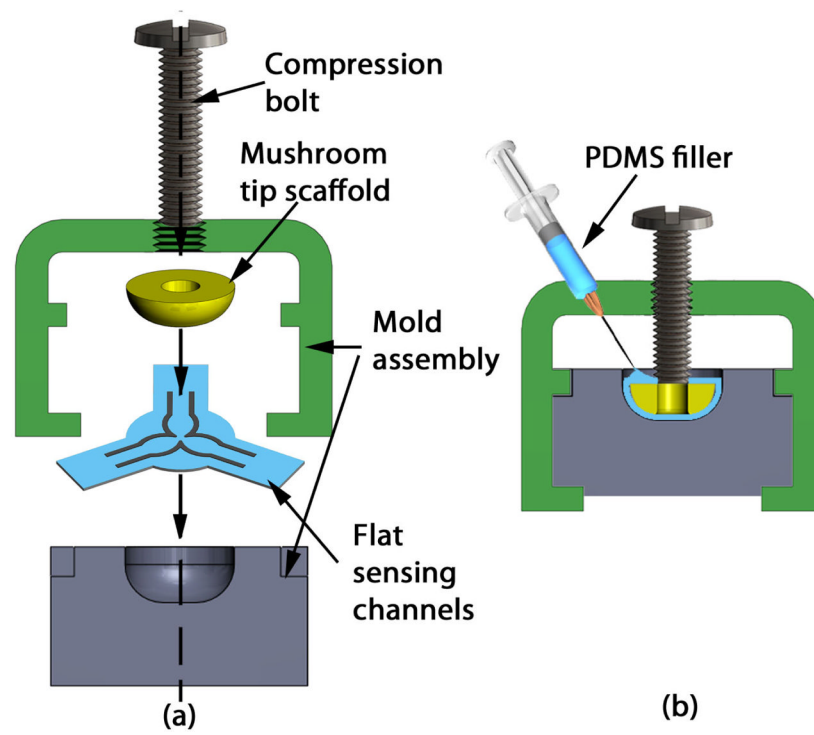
Molding flat array of sensing channels onto a hemispherical tip scaffold. (a) Section view of the mold assembly, (b) Assembled mold with hemispherical tip.
